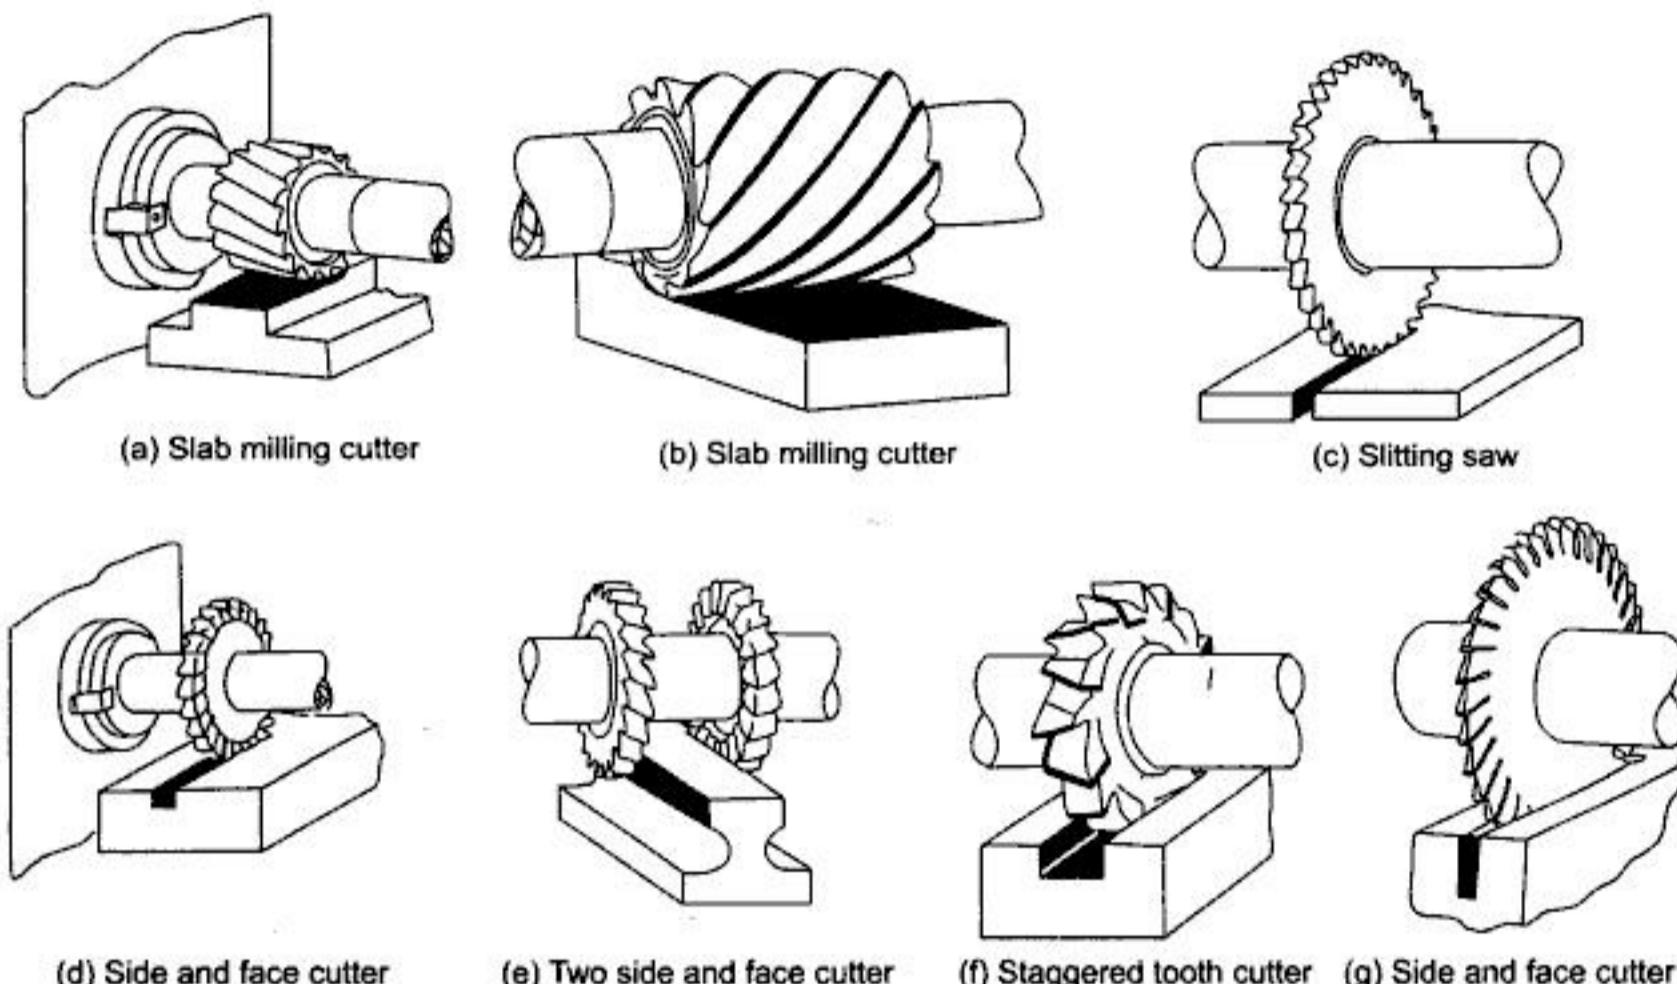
Arbour mounted milling cutters (general purpose).
